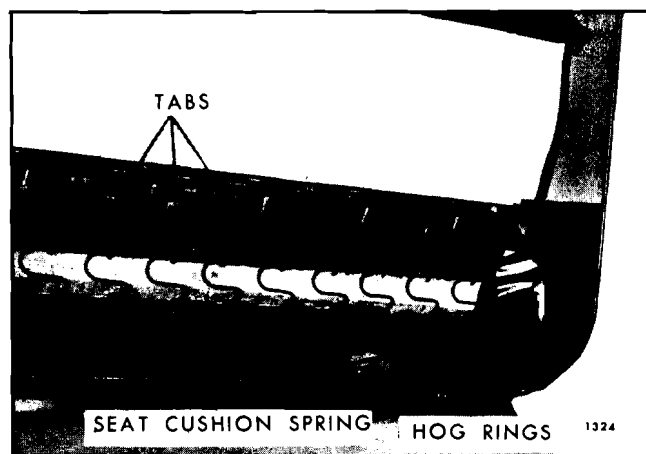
Seat Cushion-to-Back Spring Attachment
